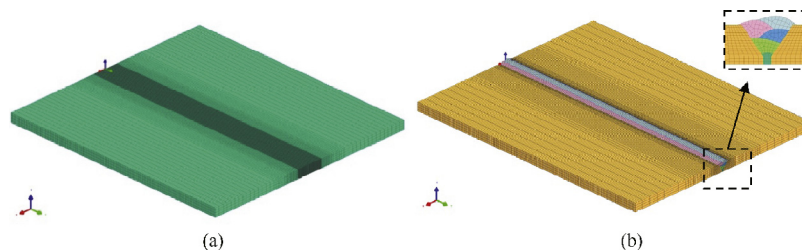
FE model of weld joint (a) A-GTAW (b) SMAW.
